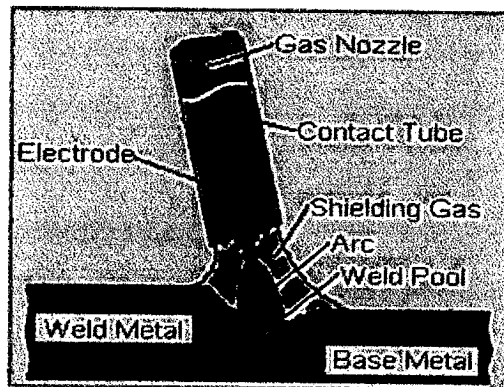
Basic Structure of Metal Inert Gas (MIG) Welding [2]
